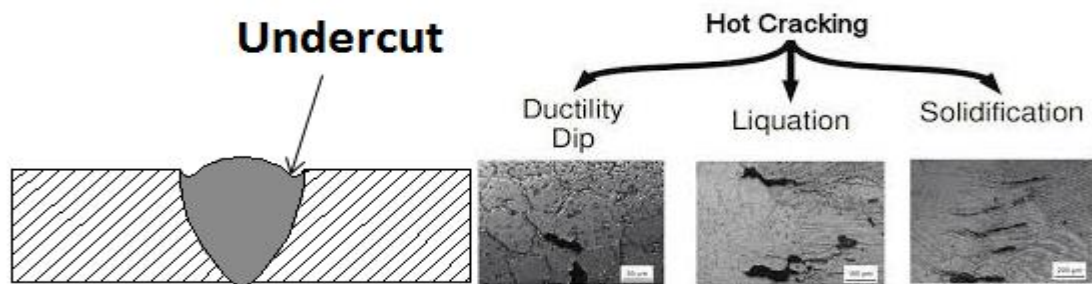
Undercut & Hot Cracking in welding
